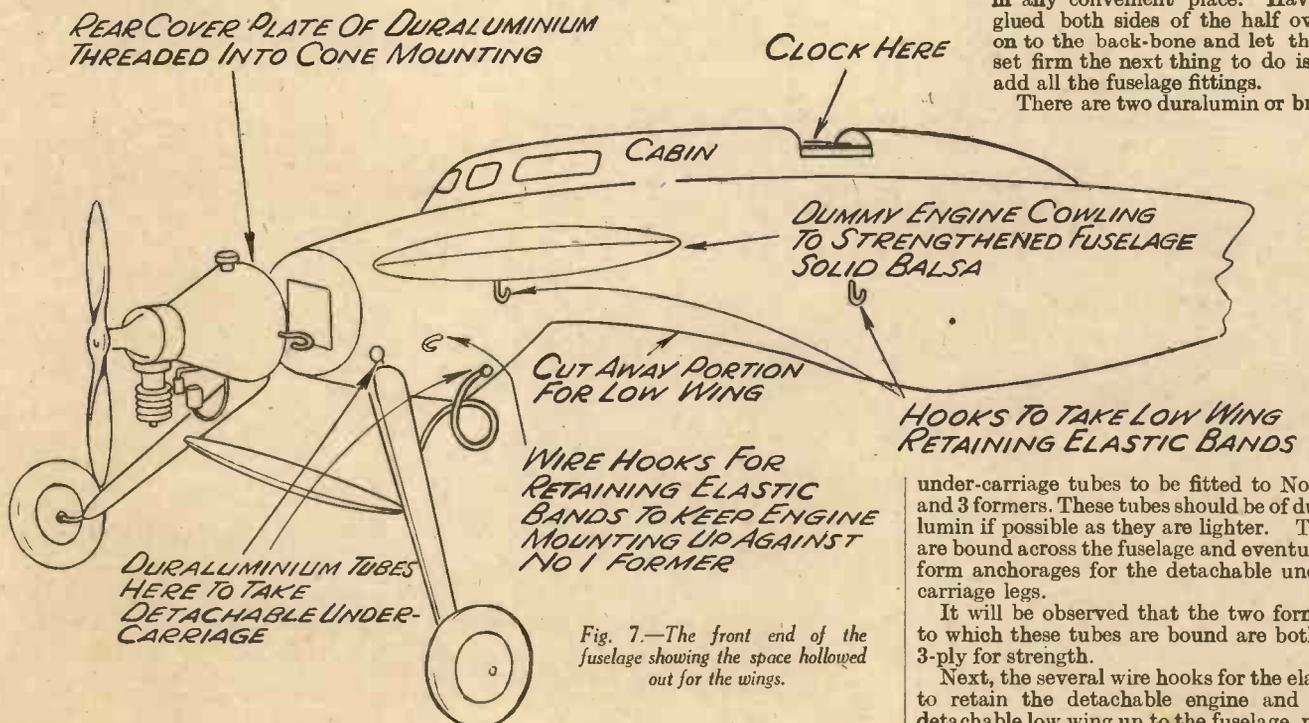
The front end of the fuselage showing the space hollowed out for the wings.
